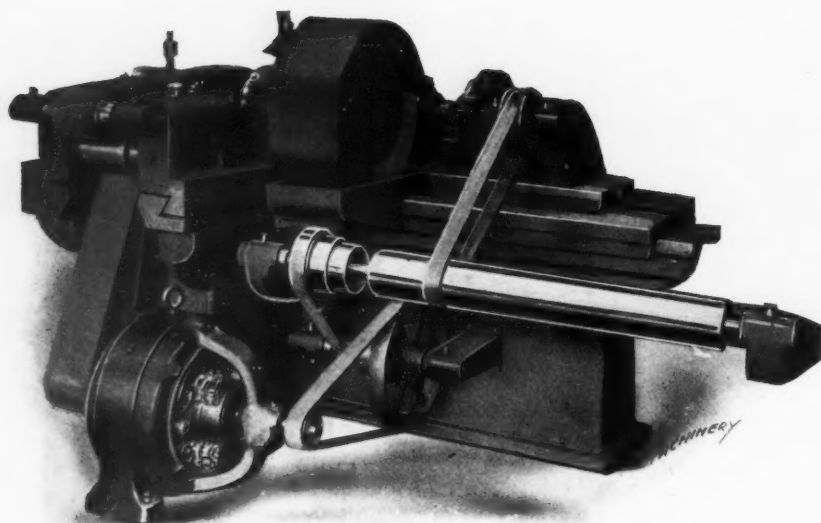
Rear View of Machine shown in Fig. 1, equipped for Individual Motor Drive
